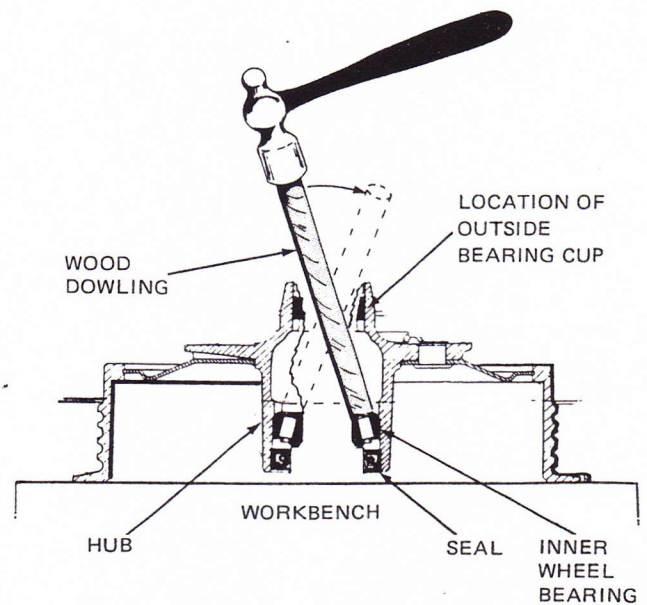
Removing Wheel Bearing from Hub. As you use a hammer to tap on the end of the wooden dowling, alternate the positions of the dowling to remove the bearing and seal from the hub.
